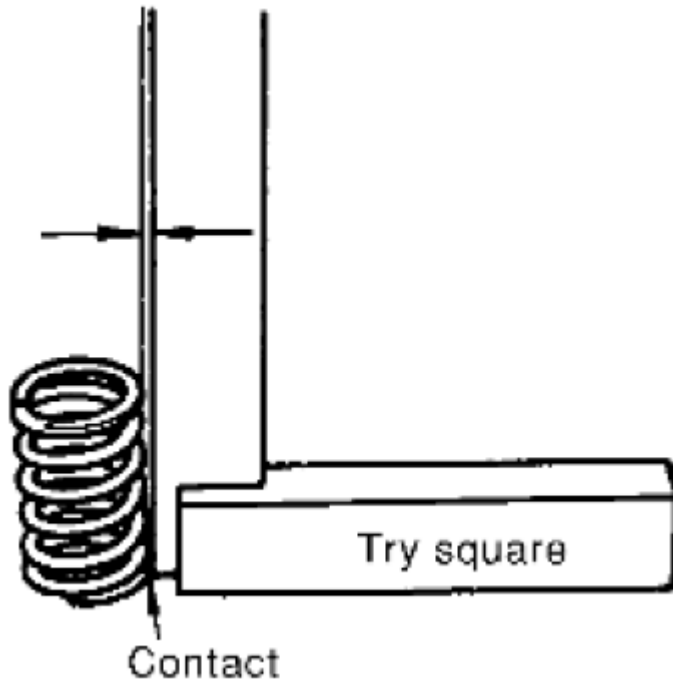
Measuring Maximum Clearance Between Top Face Of Spring And Try Square
